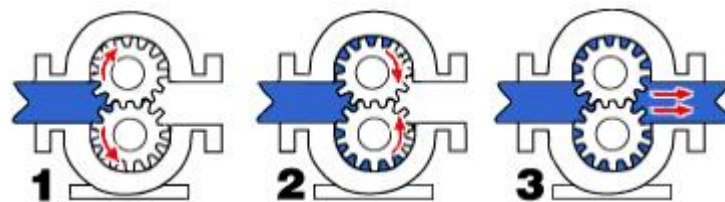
Three-stage pumping method: inlet, displacement and outlet /26/
